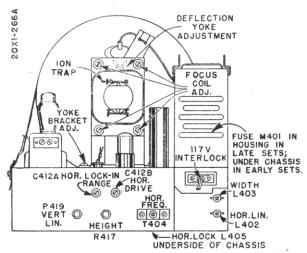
Rear View of Chassis. (Screw-type focus coil adjustment shown here used in early sets only.)
